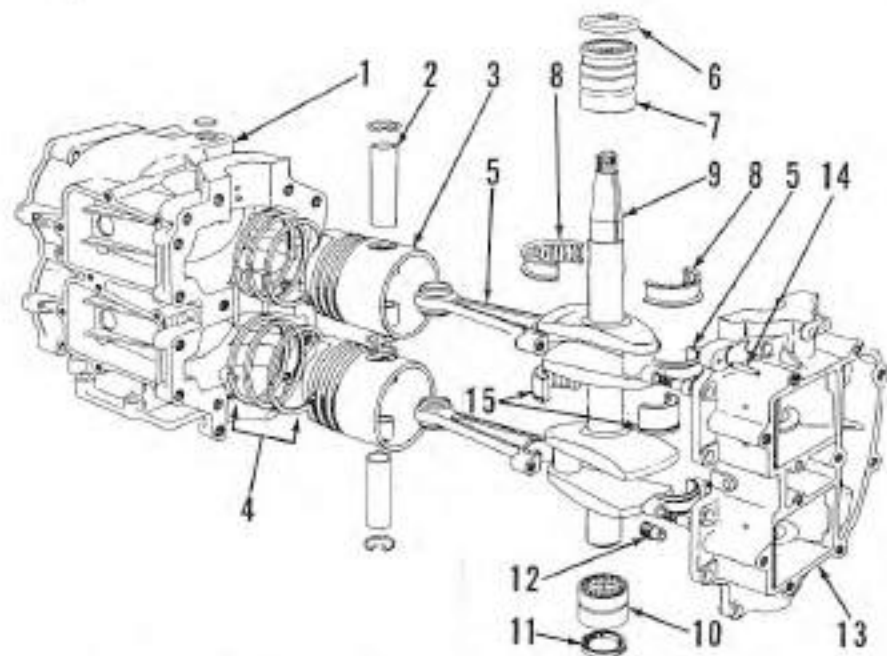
Exploded view of power head used on Fleet Scott models.
